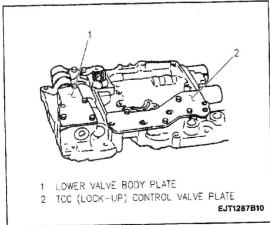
Lower Valve Body Plate and TCC (Lock-Up)
